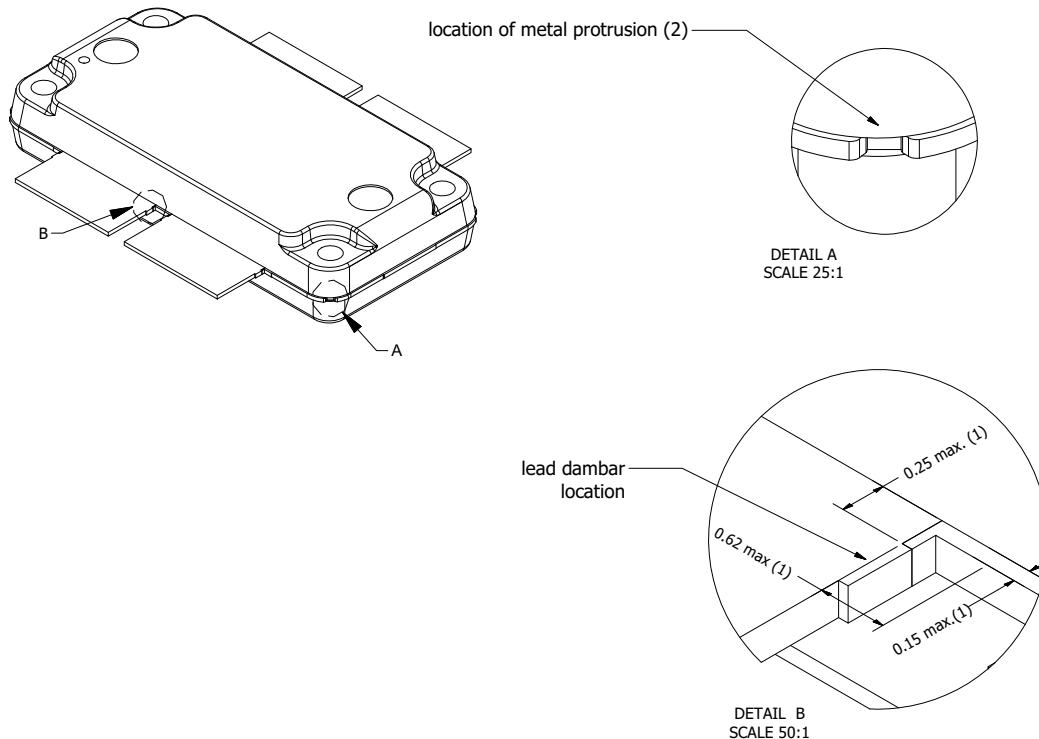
Package outline SOT1138-3 (sheet 1 of 2)
